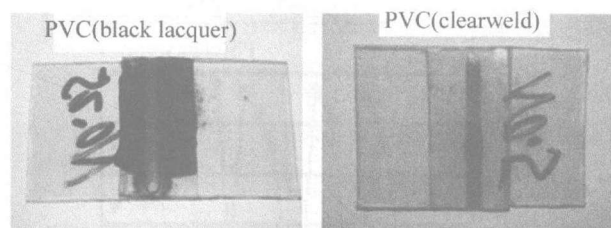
Appearance of PVC coated with black lacquer and clearweld additive after welding
